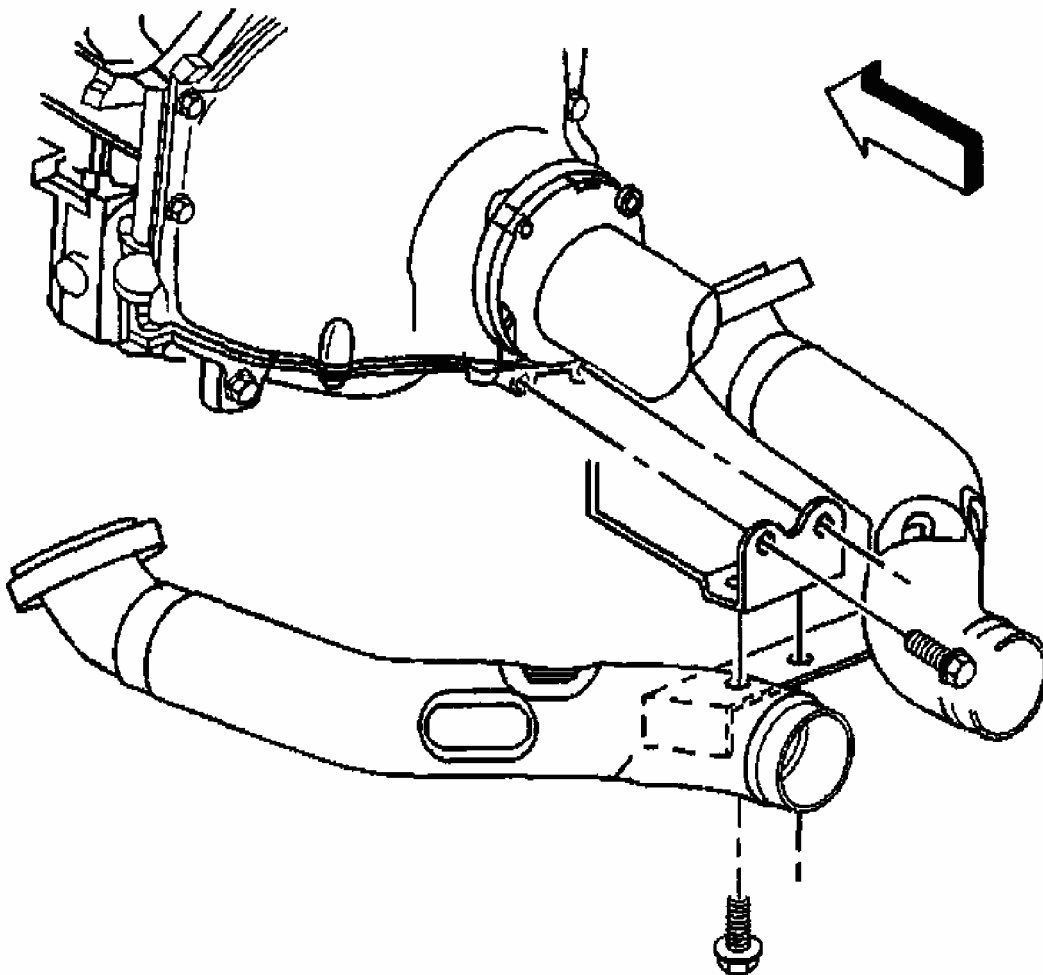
Installing Exhaust Pipe Hanger Bolts
